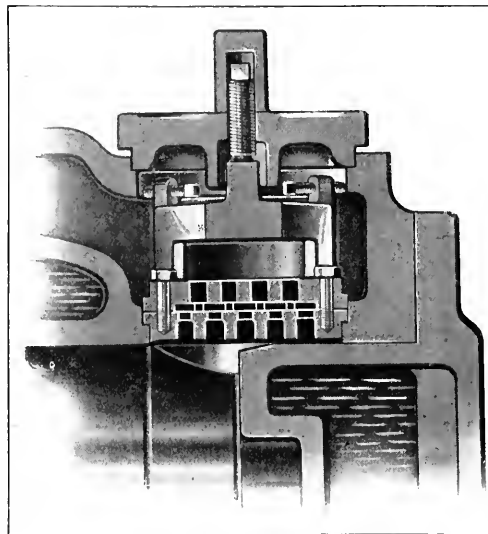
DETAILS OF THE VALVE ASSEMBLED
